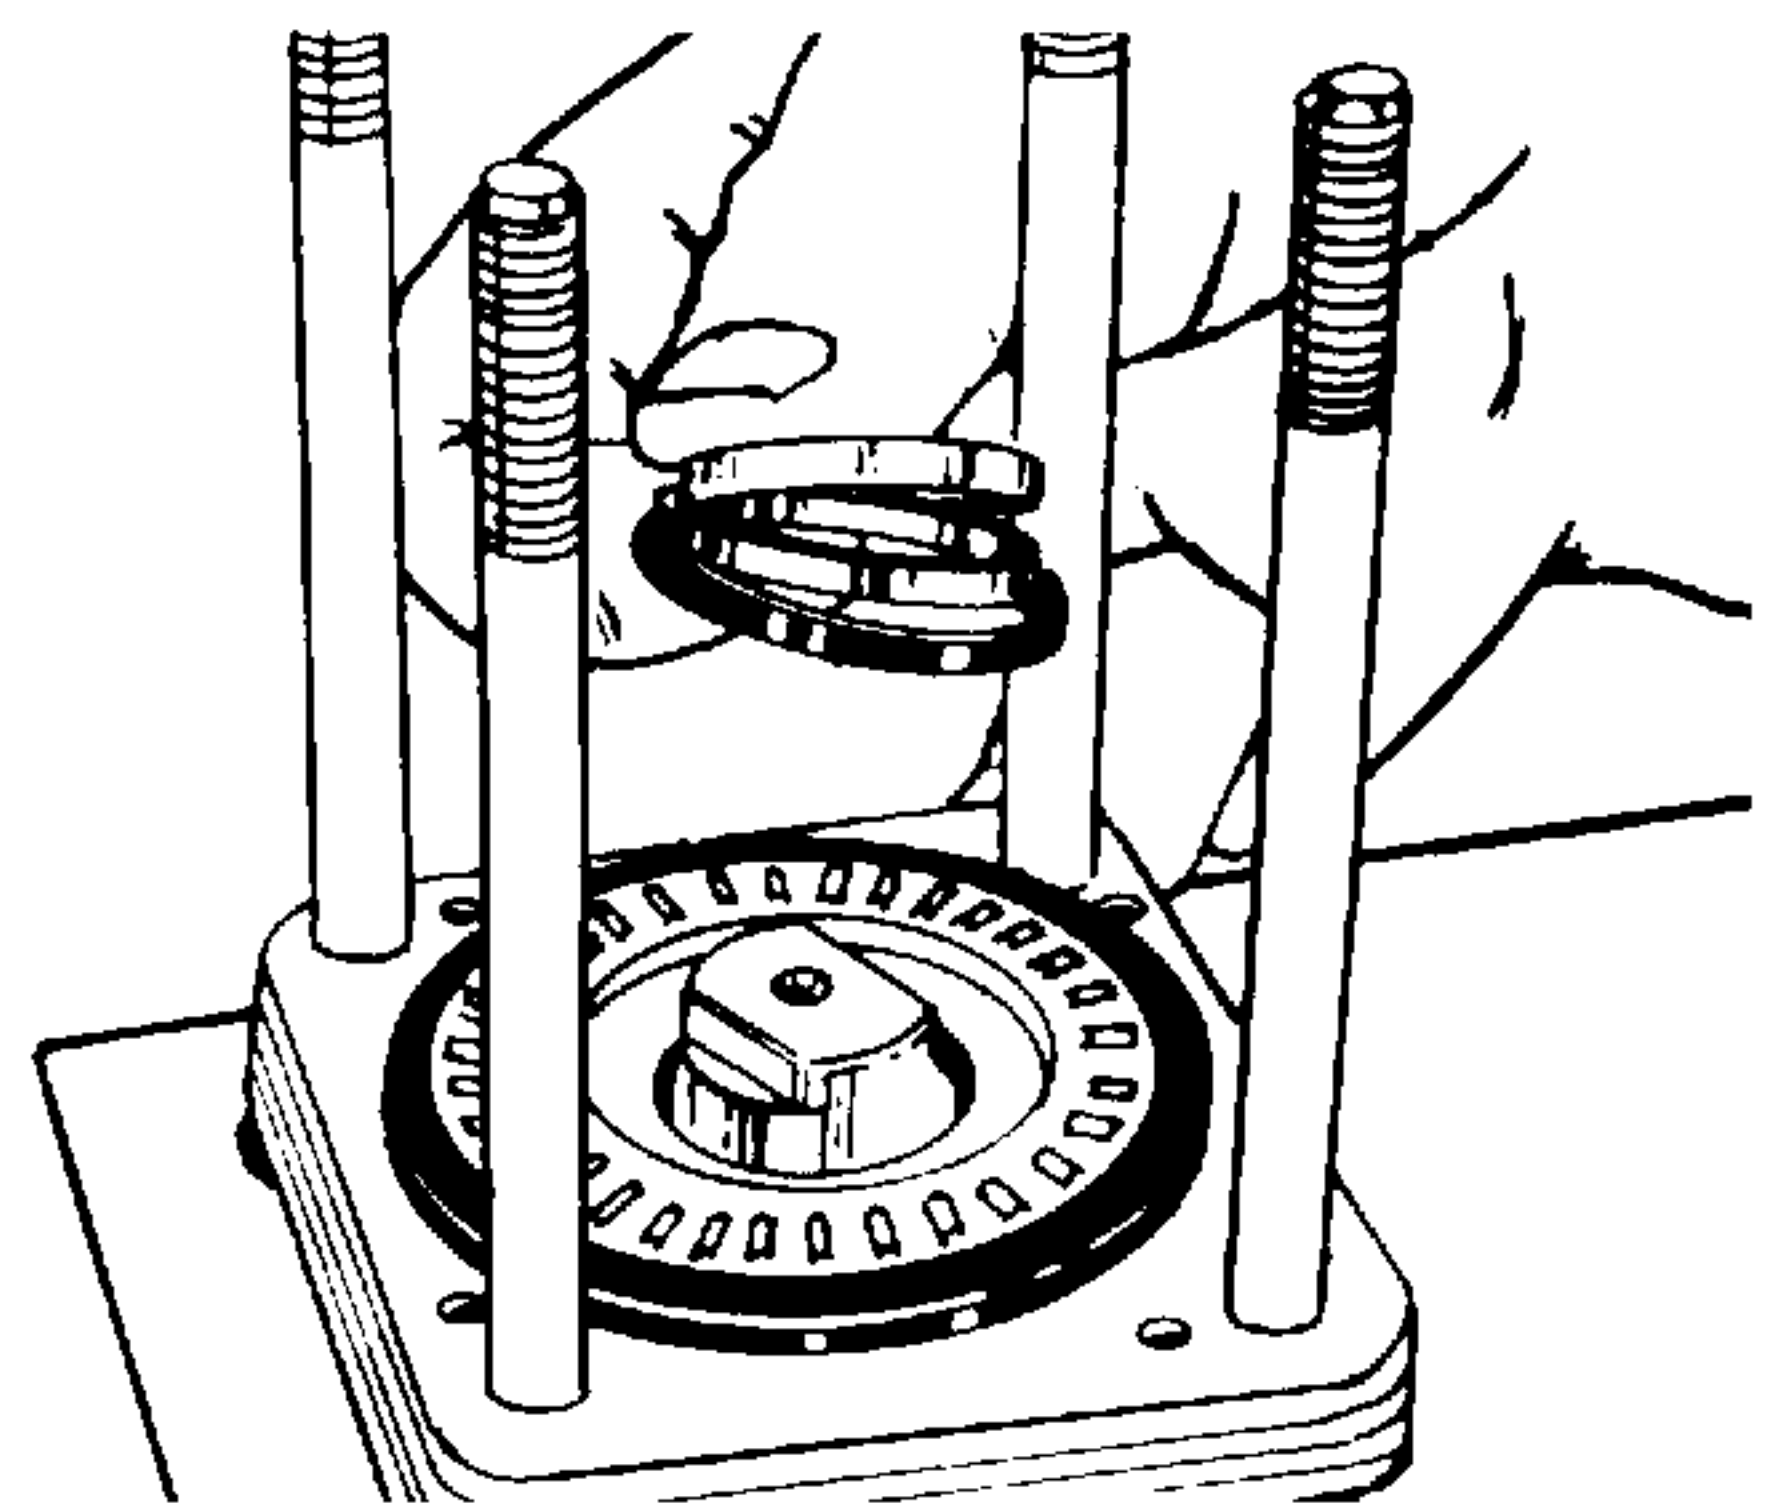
Removing Face Seal, Back-Up Ring and Spacer.
